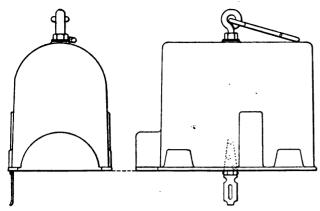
Case and Spring Connection, D Figs. 1712-1713.
